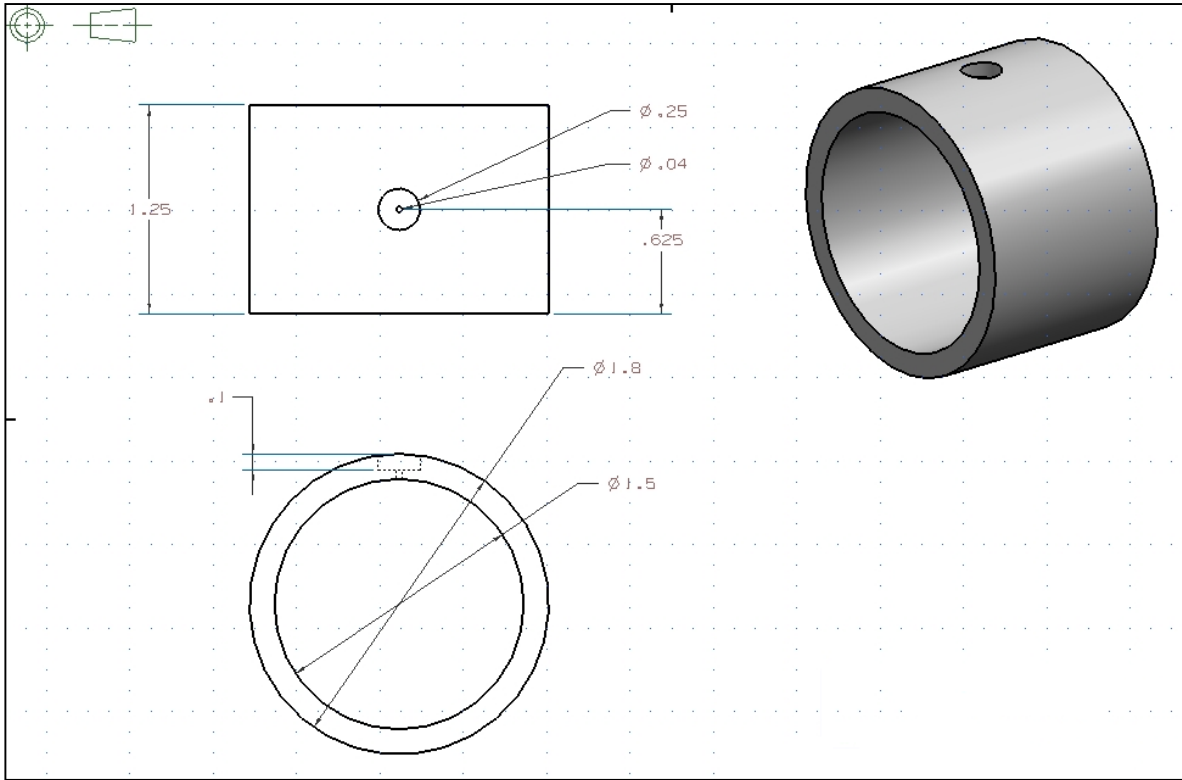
TOP, FRONT, and ISO view of Fuel Manifold Casing
